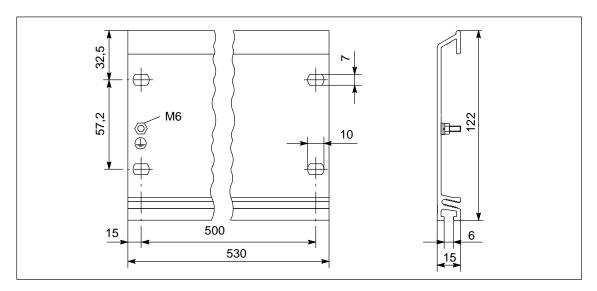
Dimension Drawing of the Rail with 530 mm Standard Width
